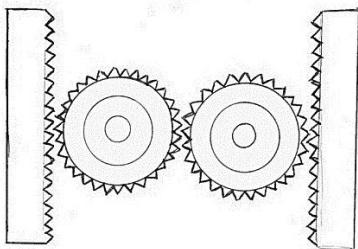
, SIDE VIEW GEAR SYSTEM BEFORE REDESIGN
